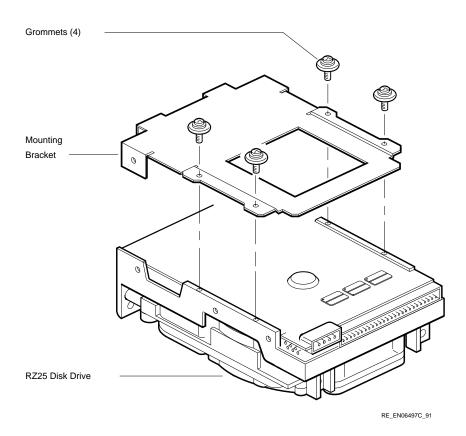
Separating the Mounting Bracket from the RZ25 Disk Drive
